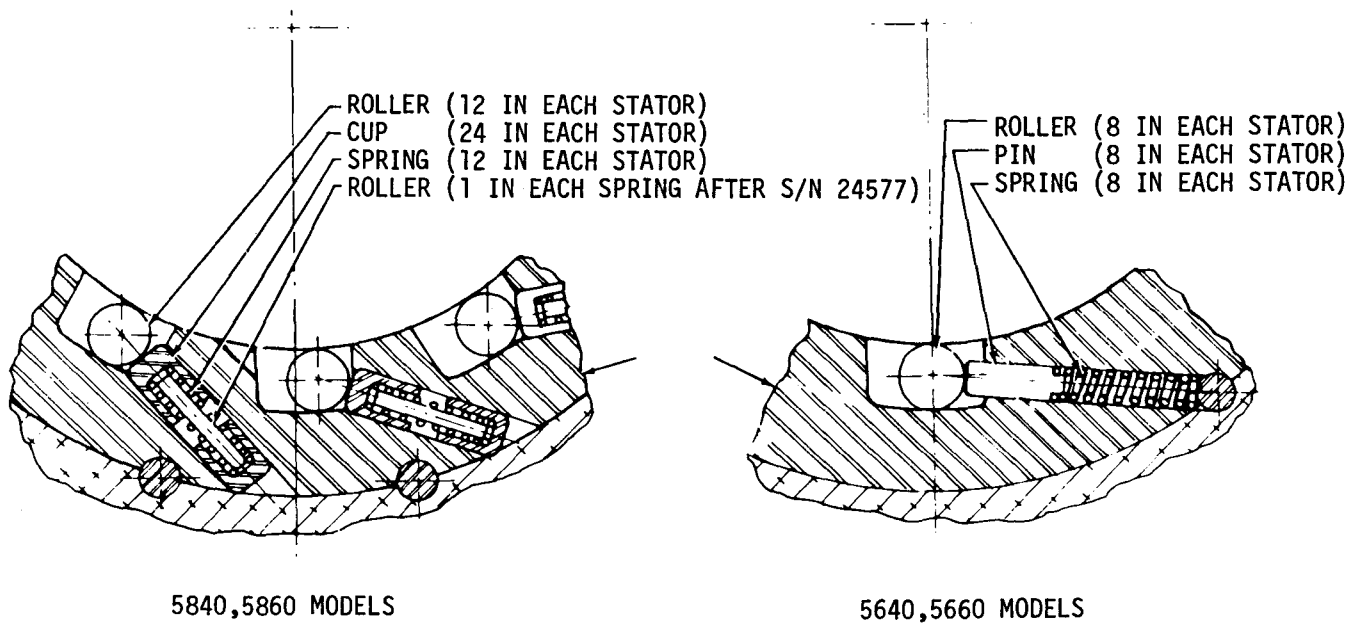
Arrangement of stator freewheel components—cross-section, front view
